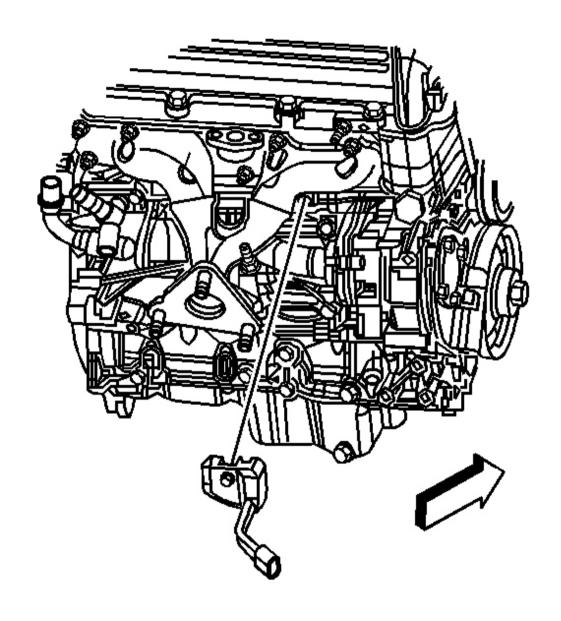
View Of Coolant Heater Courtesy of GENERAL MOTORS CORP.
